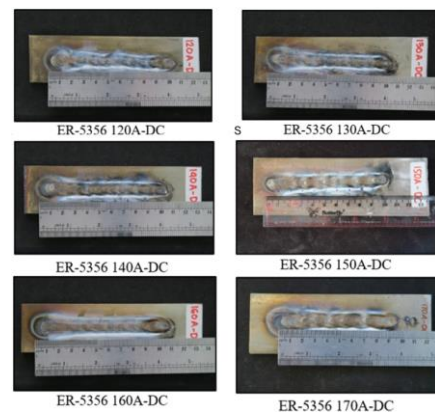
TIG welding results using filler ER5356 DC polarity.
